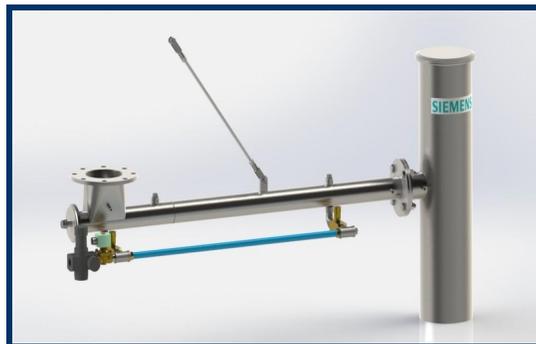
Transflow<sup>®</sup> Stinger Assembly
